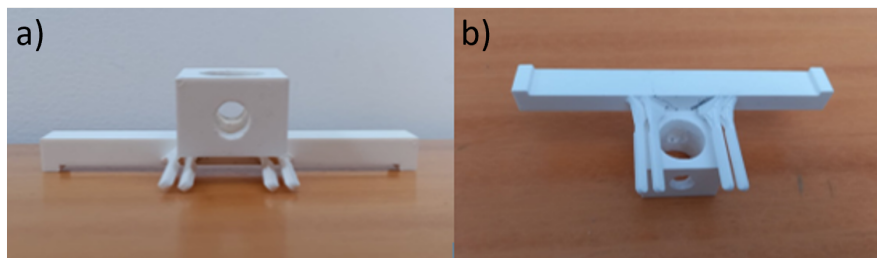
First cutting prototype: a) inclined front view; b) inclined top view.
